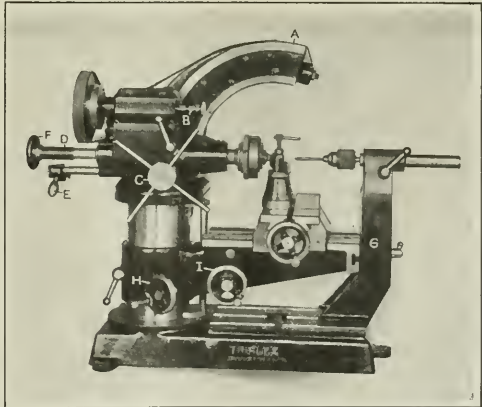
Combination Bench Lathe and Milling and Drilling Machine brought out by the Triplex Machine Tool Corporation
